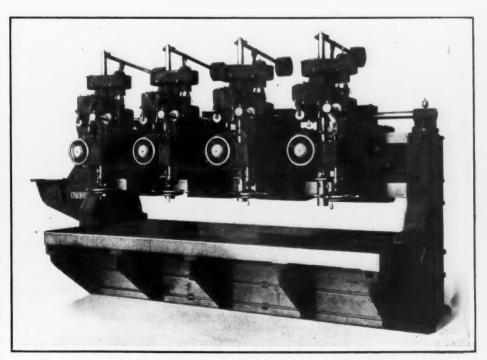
Foote-Burt Mud-ring and Flue-sheet Drilling Machine developed primarily for Railway Shops
